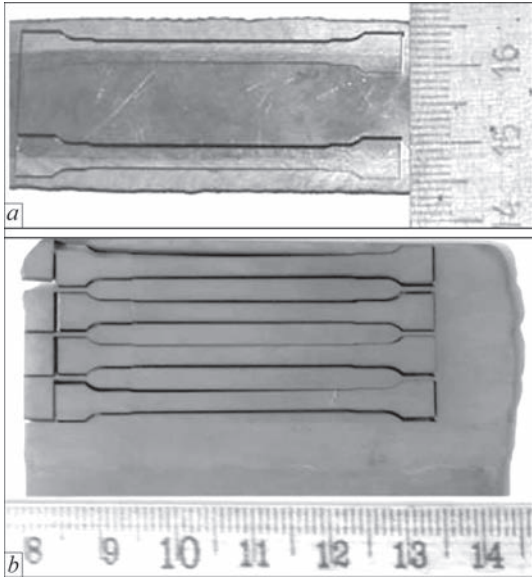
Appearance of initial welded billets with scheme of sample cutting for high-temperature mechanical tests: *a* — 50 % ZhS6U (BM) + 50 % ZhS6K (DM); *b* — ZhS6K (DM)
